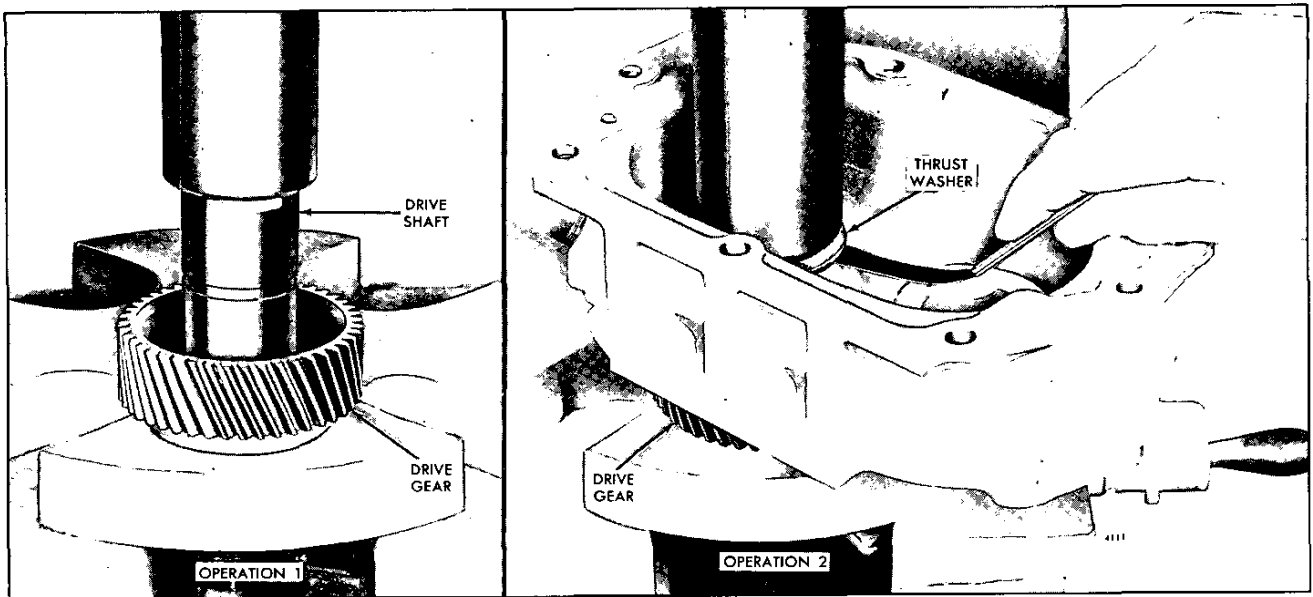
Installing Blower Drive Gear Shaft in Drive Gear
